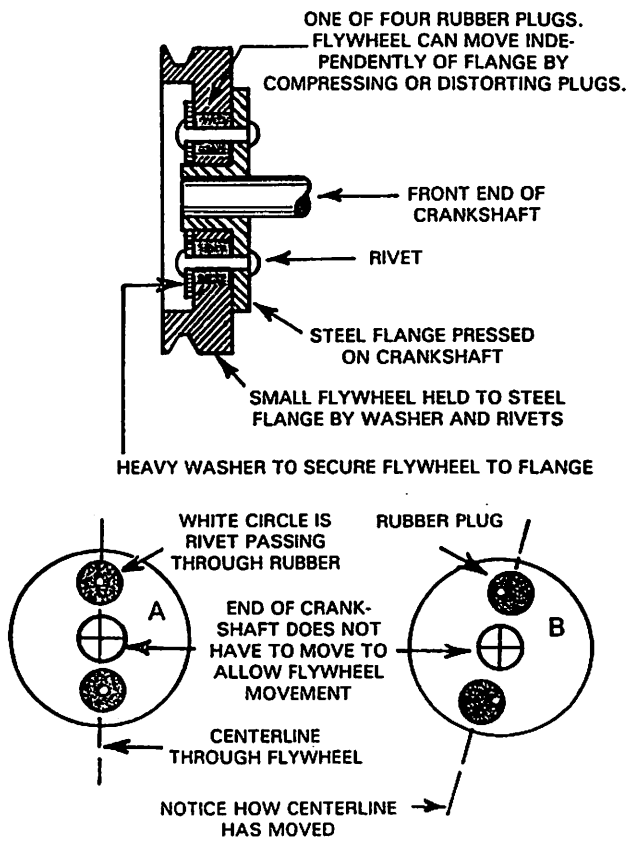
Vibration damper utilizes small flywheel which moves a limited amount, bending rubber plugs. See A and B.
